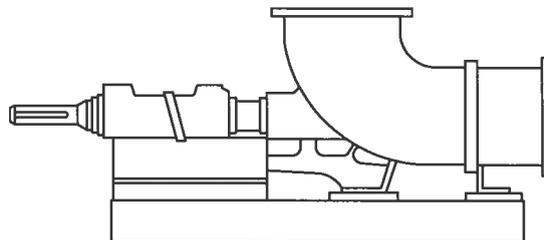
Pump type OH00: Horizontal, flexibly coupled, axial flow, single stage, overhung design
